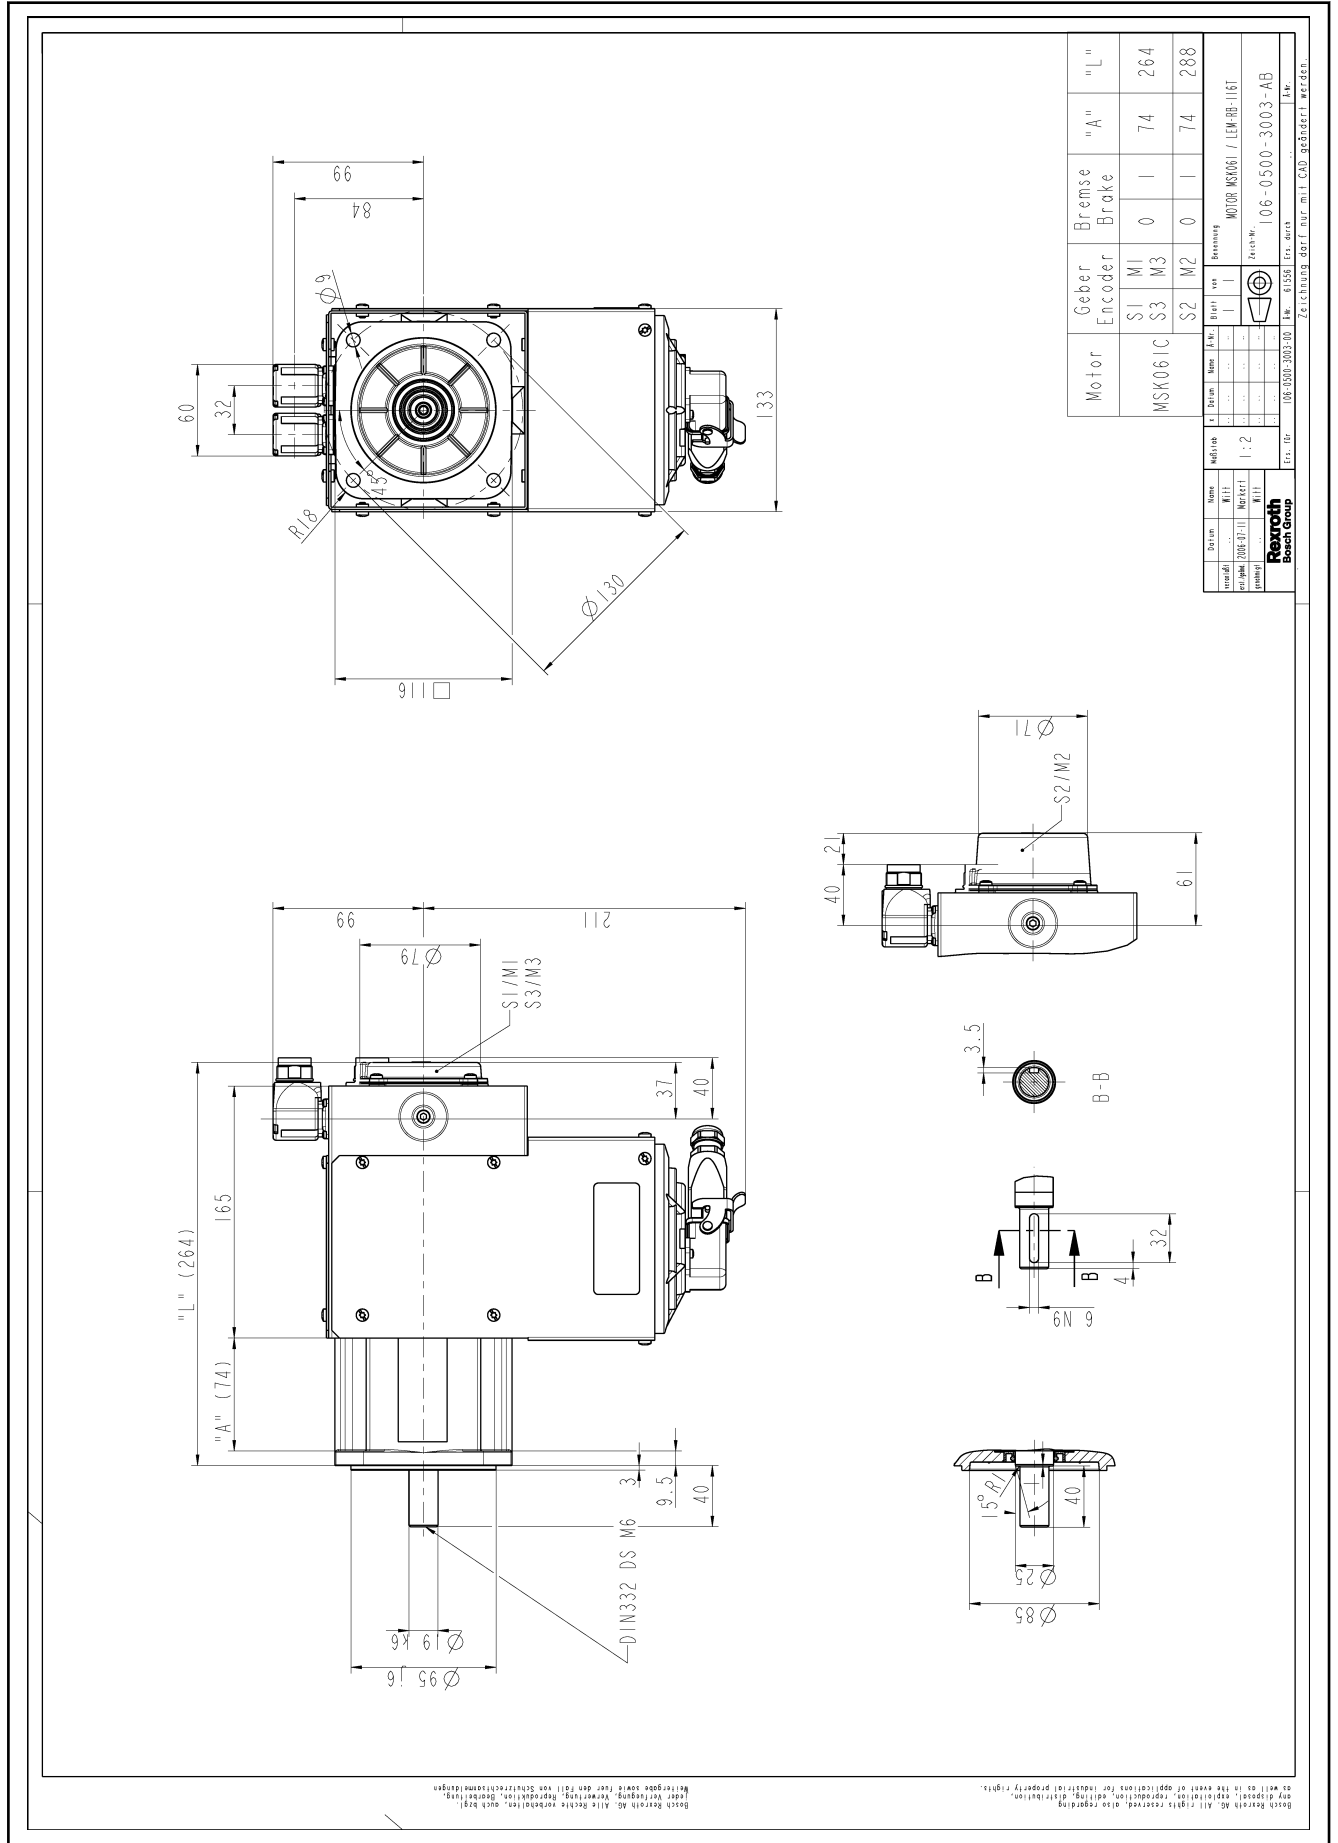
Dimension sheet MSK061 with radial fan unit
